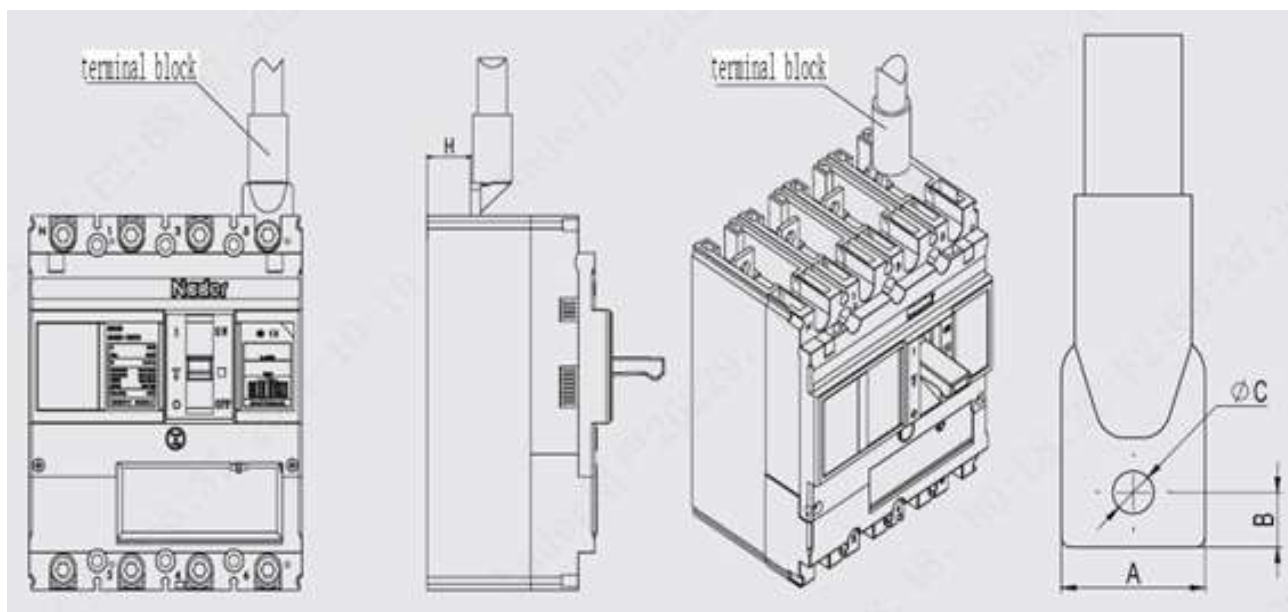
Connection diagram of copper bar in front of board or copper cable with wiring terminal
